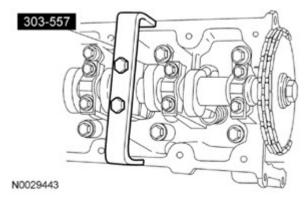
Installing/Removing Camshaft Position Aligners On Camshafts Courtesy of FORD MOTOR CO.
